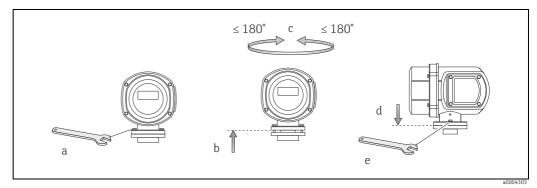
Turning the transmitter housing (stainless-steel field housing)
